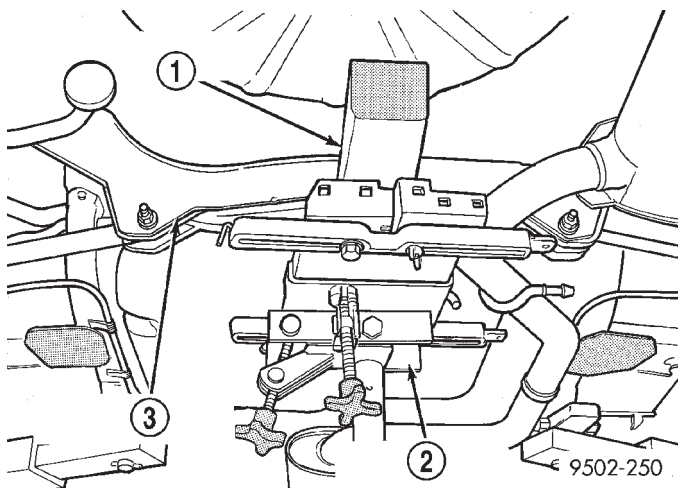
Lowering And Supporting Rear Suspension Crossmember
